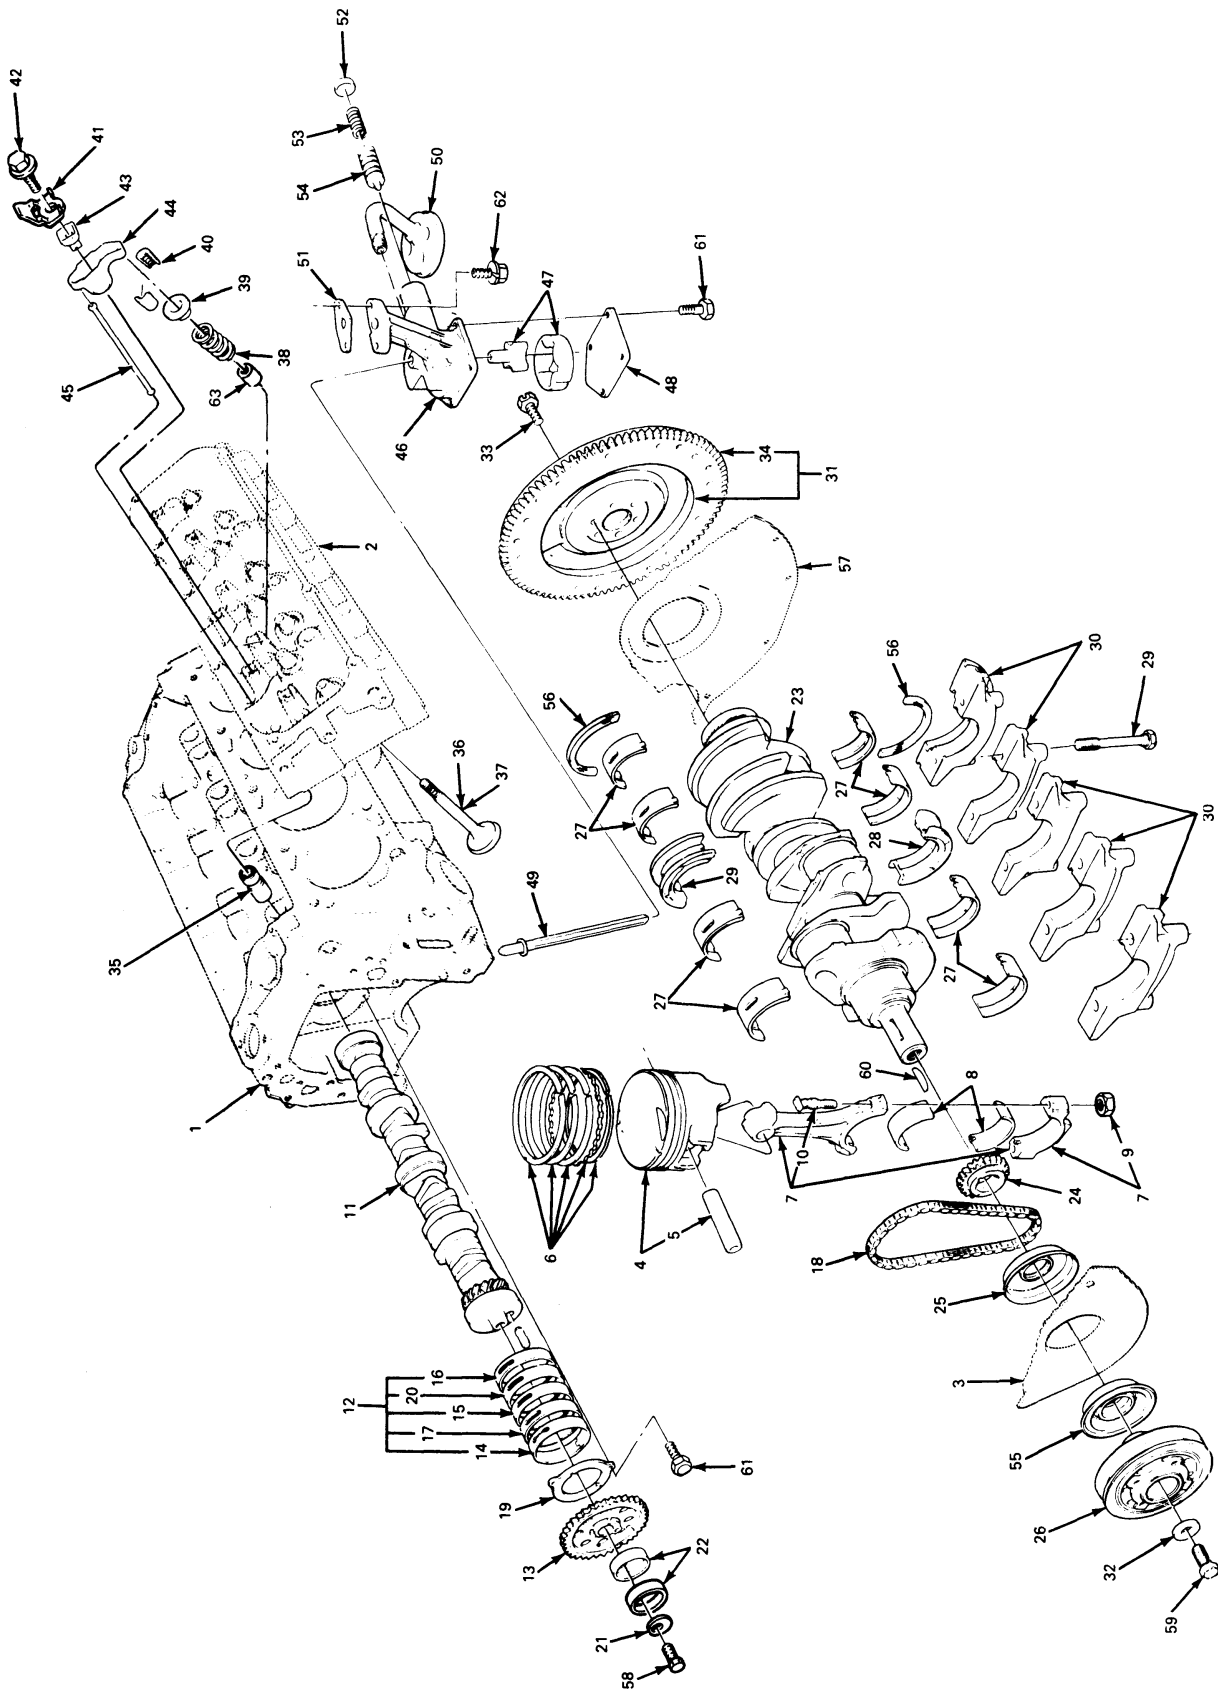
Internal Exploded View—5.8L (351 CID) M-V-8 and 6.6L (400 CID) V-8 Engines
